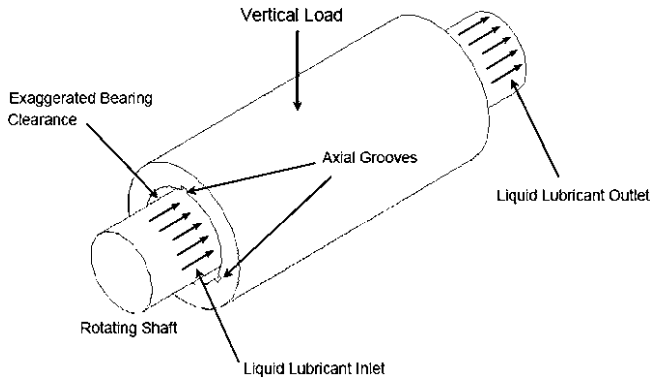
A schematic diagram of the clearance space of the bearing showing two representative axial groove
